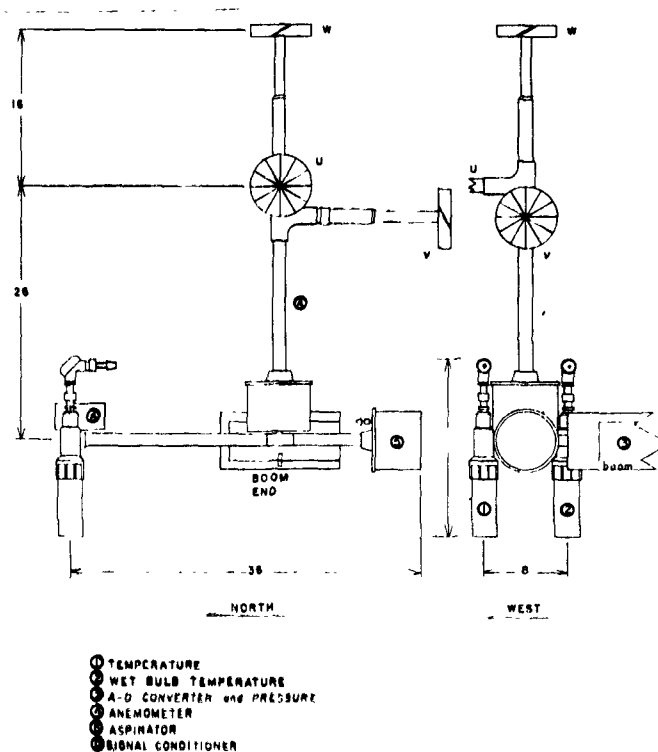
Instrument Package, dimensions in inches. Wind component sensors indicated by letters u, v and w.
